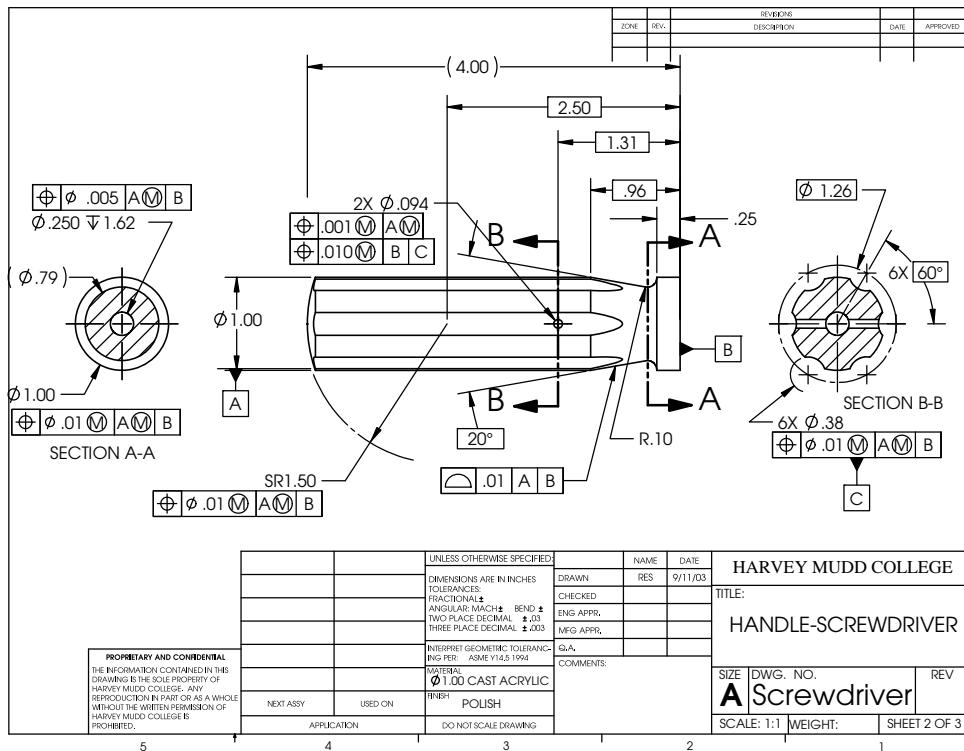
A detail drawing of the handle of a screwdriver. This drawing uses a set of symbols and the particular placement of these symbols conveys information about the size and location of certain features of the screwdriver handle. In addition, the drawing contains information about the materials to be used, the finish of the part, the person who created it, and the date it was created. Drawing courtesy of R. Erik Spjut.
